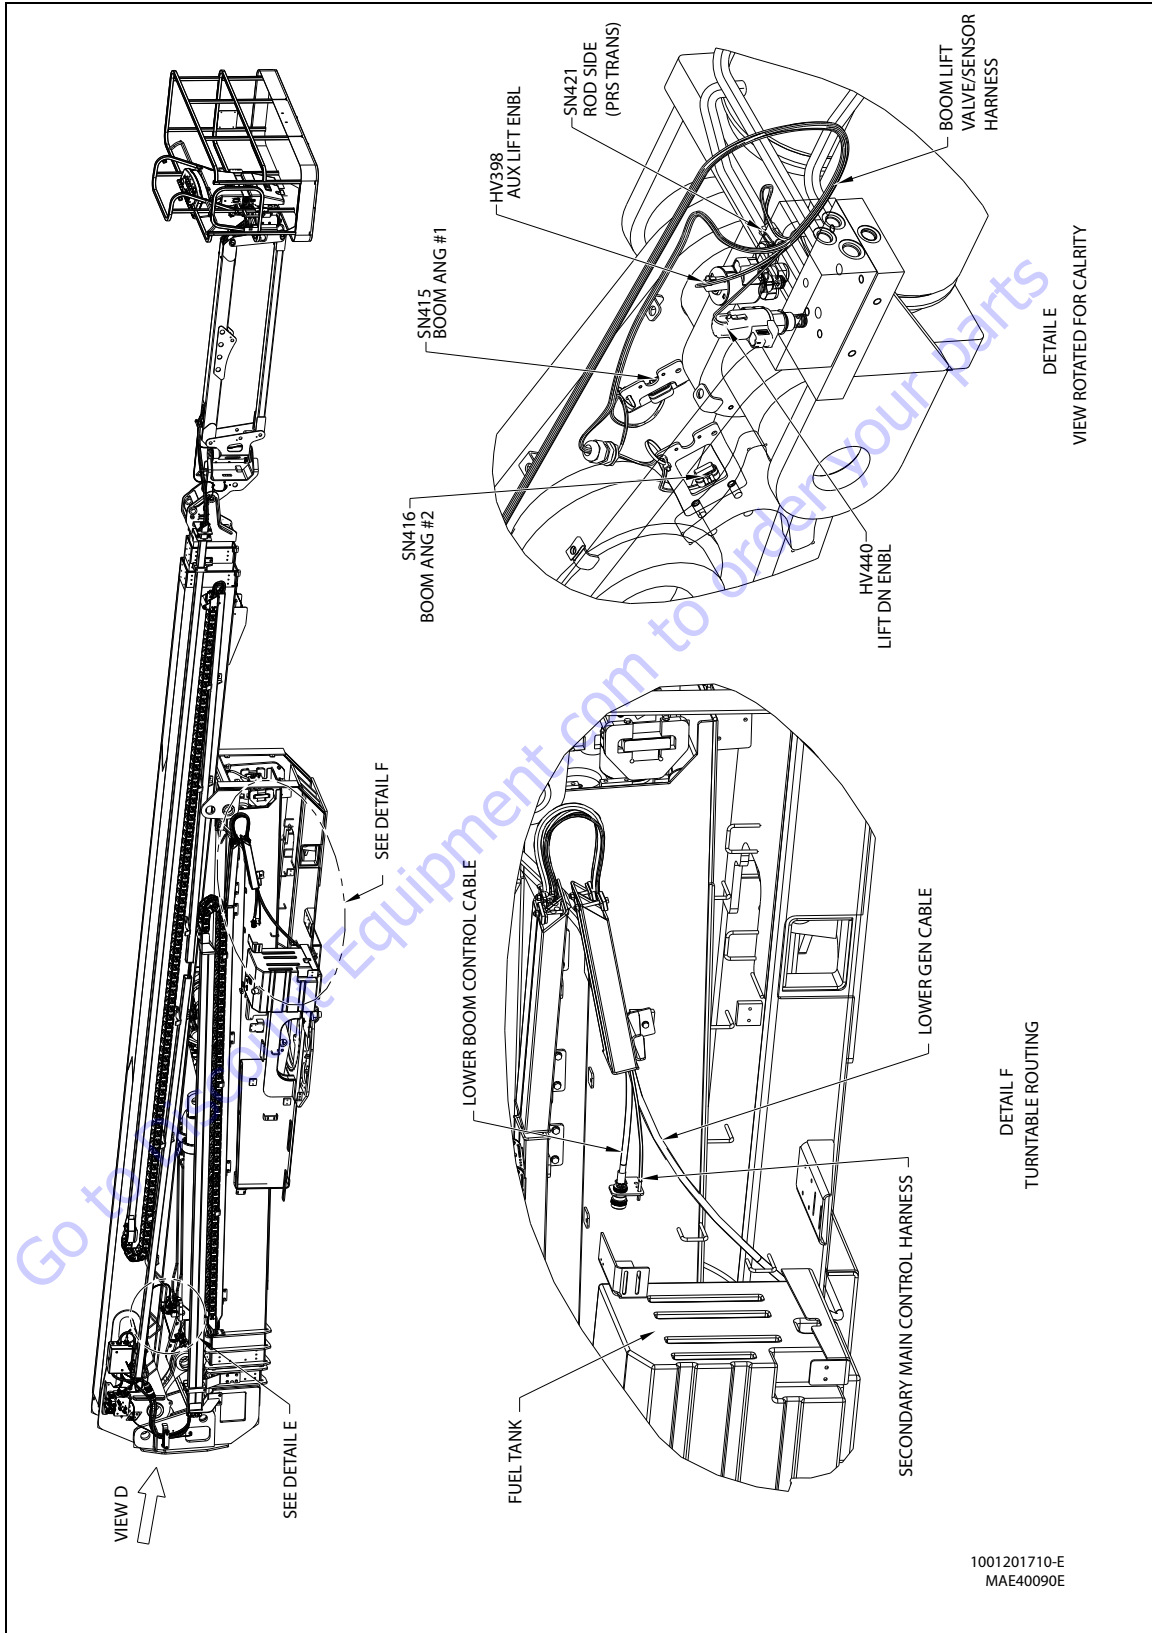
Boom Electrical Installation (4000W Generator) - Sheet 2 of 5
